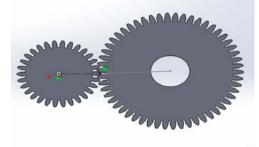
Meshing of Gear A and Gear B MATERIAL OF THE GEAR PAIR The material of the Spur gears used in Enterprise-3310 Lathe Machine is Cast Iron(Ductile)-
